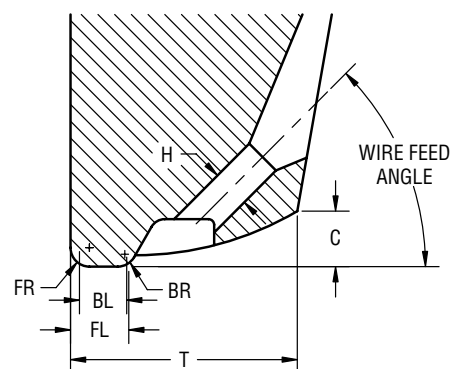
Cross-sectional view of a MaxiBond wedge with standard dimensions identified
